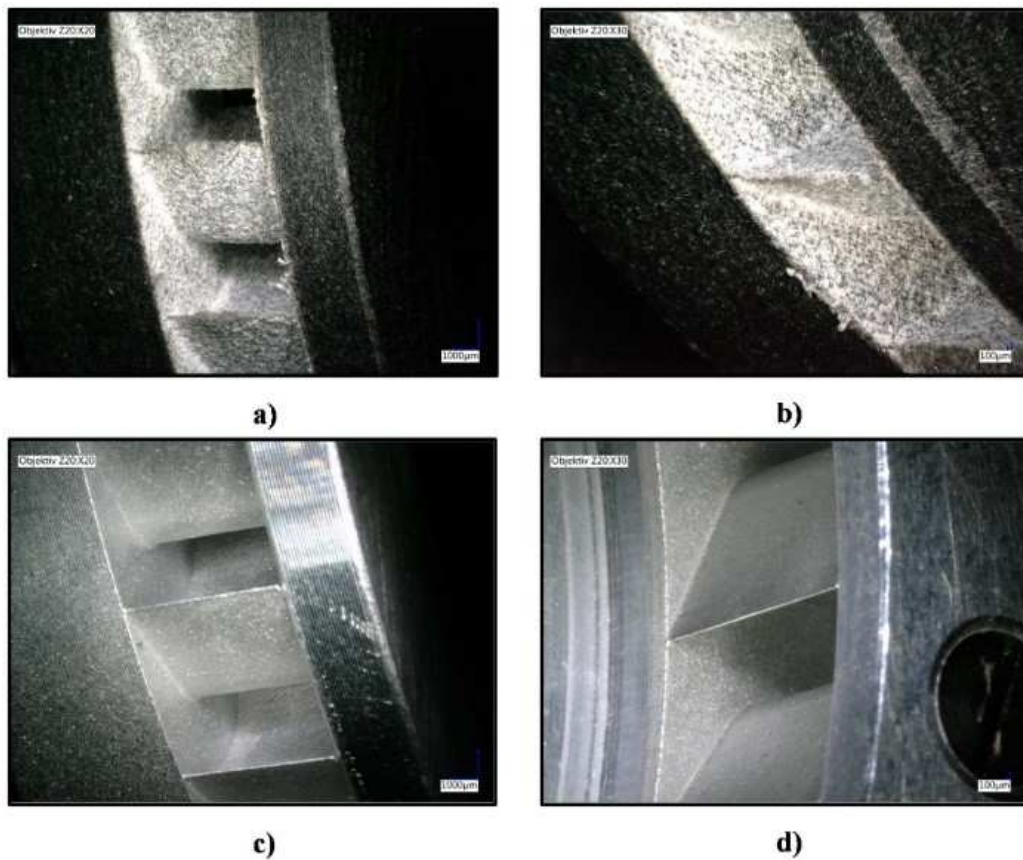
Surface texture of: a) Printed rotor overview; b) Printed rotor detailed view; c) Milled rotor overview; d) Milled rotor detailed view
